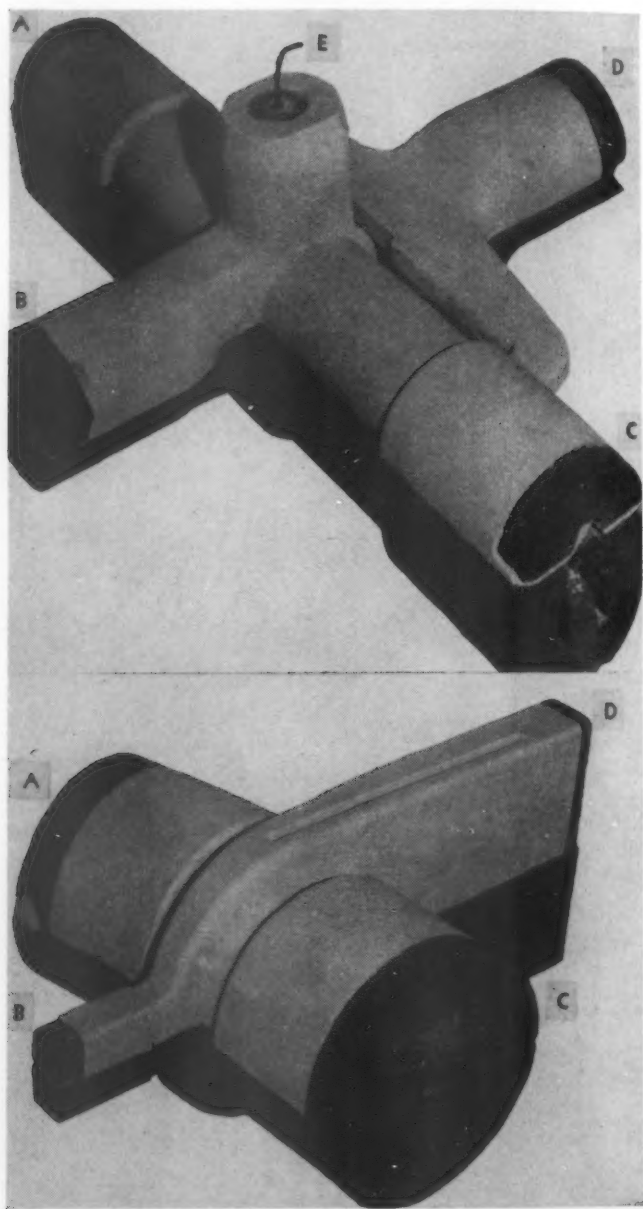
SHOWING GREEN-TOPPED CORES FOR 15-IN. GATE VALVE AND OIL PUMP BODY WITH DRY SAND HOLDING DOWN SEGMENTS.
